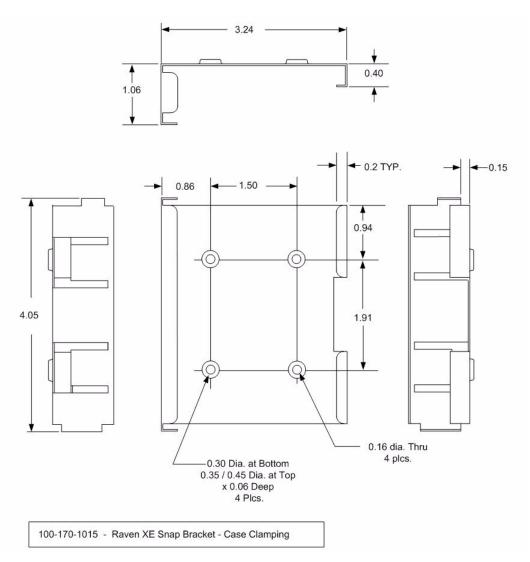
Mounting Bracket for Raven XE; Dimensions in Inches
